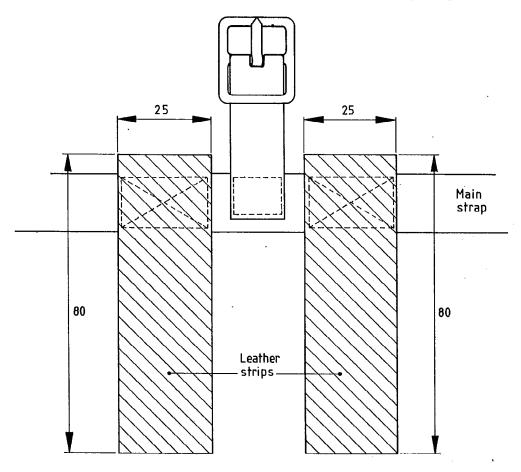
/8b. General view of type B test piece cut from the upper of figure 5.11/8a showing the two strips which need to be sewn on
